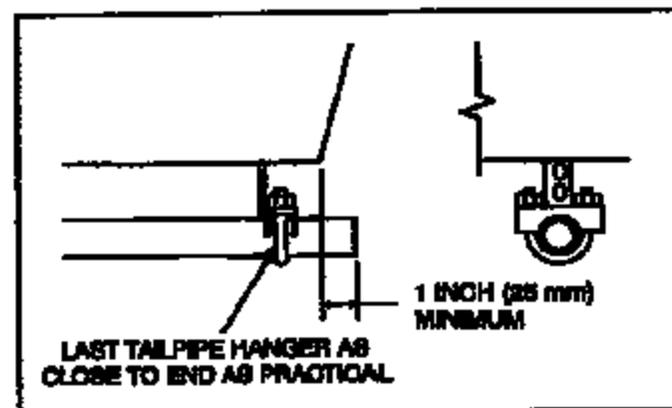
EXHAUST TAILPIPE TERMINATION
